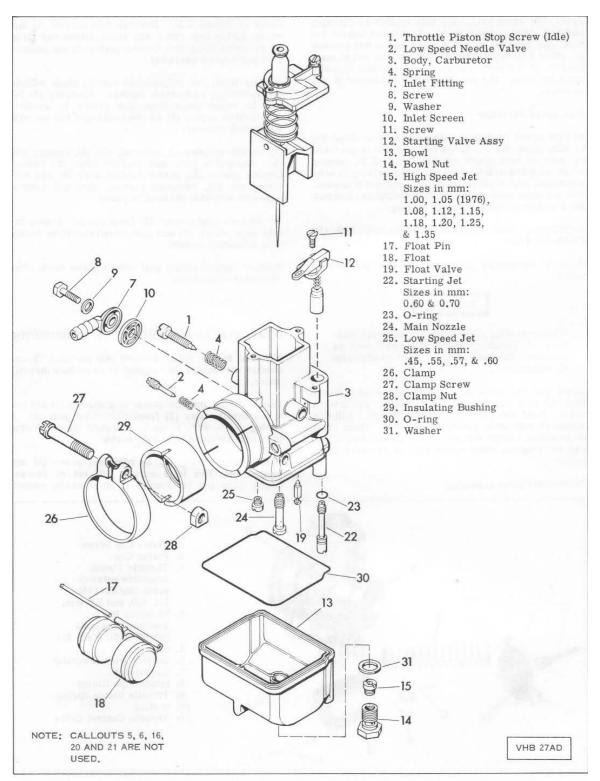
A. Exploded View of SS/SX-175 Carburetor
